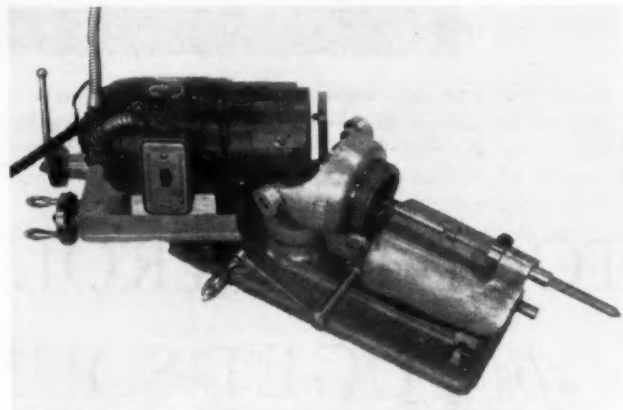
SMALL DRILL GRINDER AS DEVELOPED FOR GRINDING $\frac{1}{4}$ TO $\frac{3}{4}$ -IN-DIAM DRILLS
